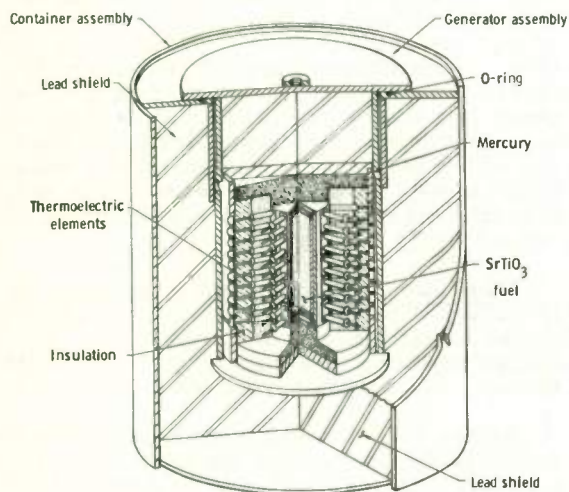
Cutaway View of Thermoelectric Generator and Shield Assembly
